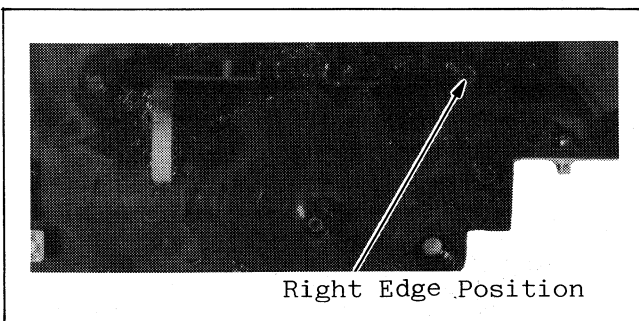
Adjustment of Cassette Up Gears-(7)
